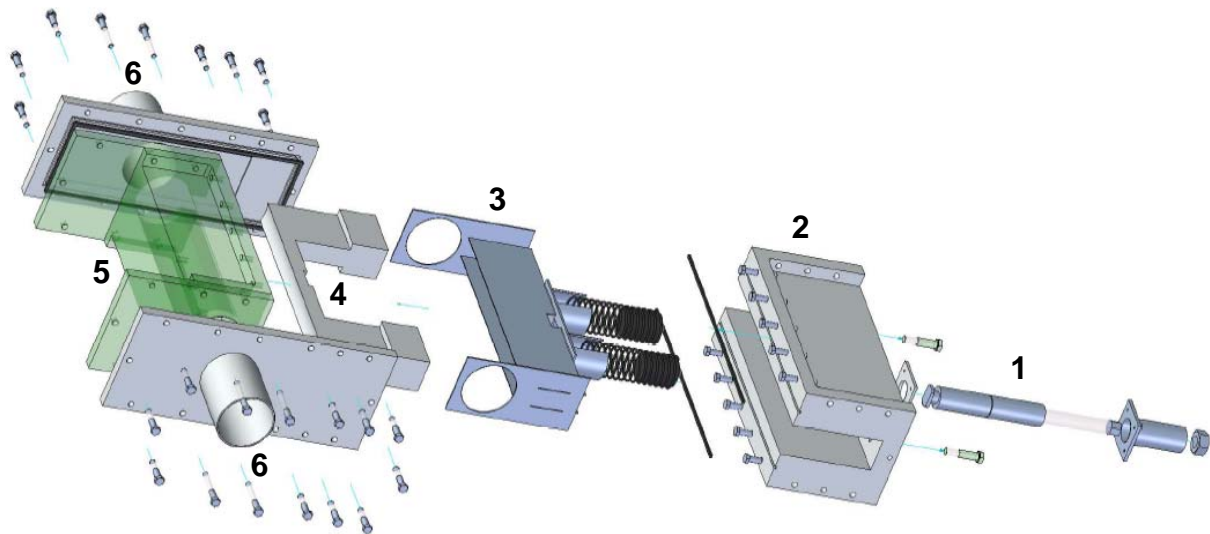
Exploded assembly drawing of the slug-catcher. 1. Shaft axle, 2. Aluminum component, 3. Separating metal sheets, 4. Stop position for the separating sheets, 5. Plexiglas component for process control, 6. Connection with the conveying pipeline
